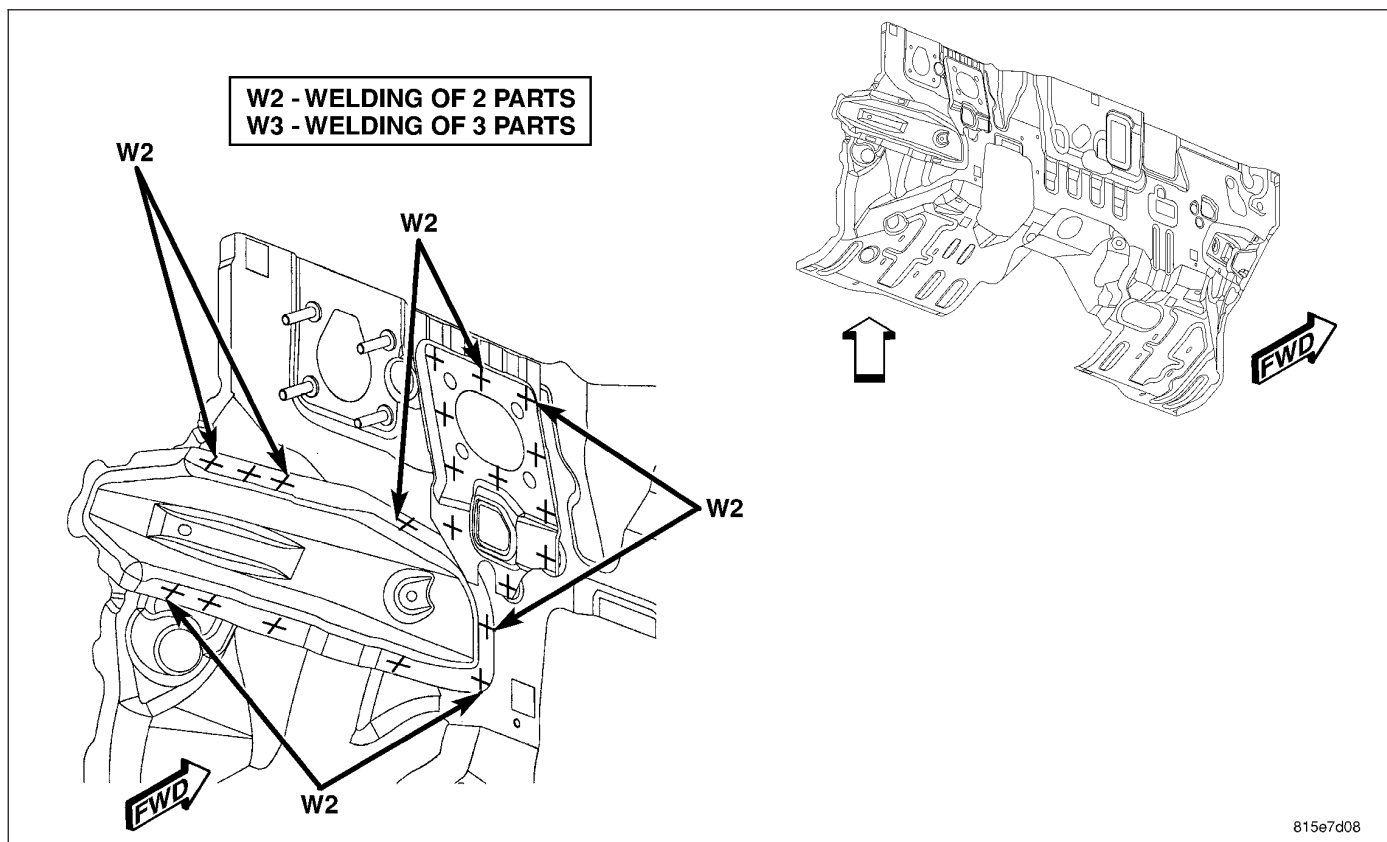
SIDEMEMBER ASSEMBLY (16 OF 17)
